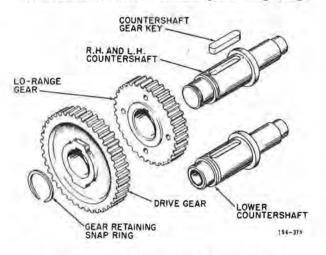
Compound Countershaft Assembly (TRDXL 107 and 1071)
